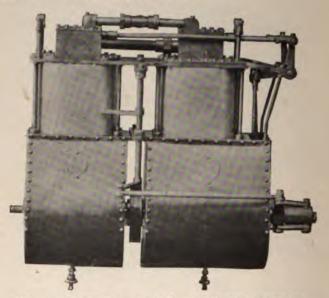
FOUR-CYLINDER SINGLE ACTING ENGINE.
